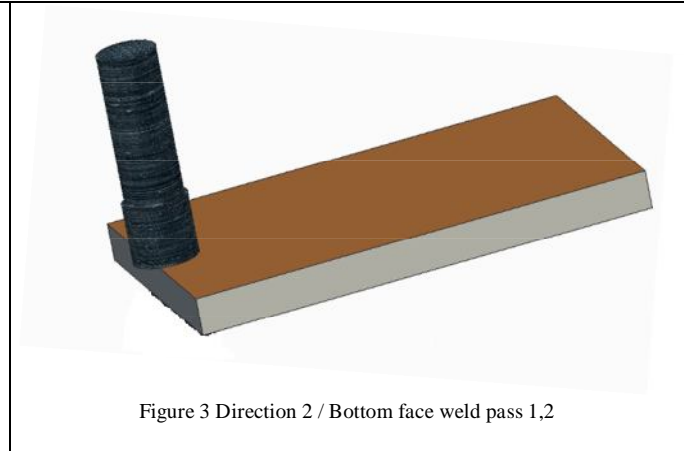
Direction 2 / Bottom face weld pass 1,2
